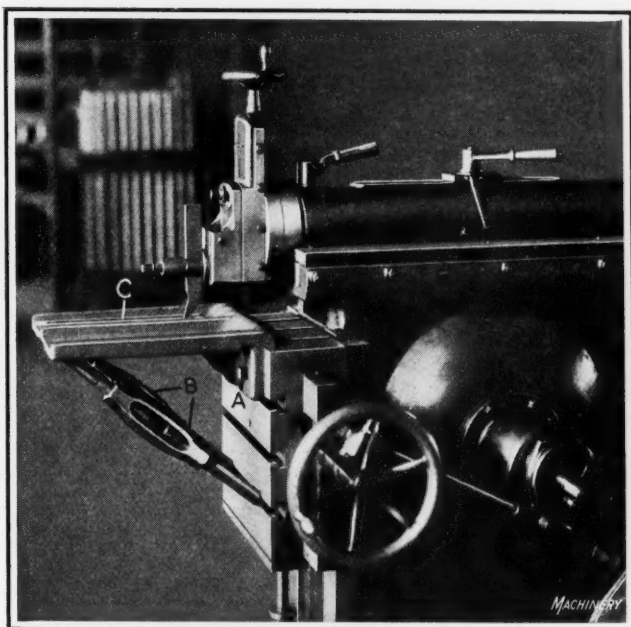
Method of setting up Shaper Table Support for performing a Short Planing Operation on the Shaper
